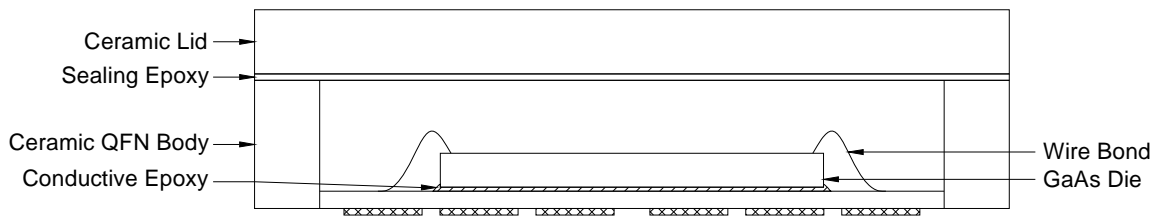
A cross-sectional drawing of a typical QFN package with GaAs die and mechanical attachment features.
